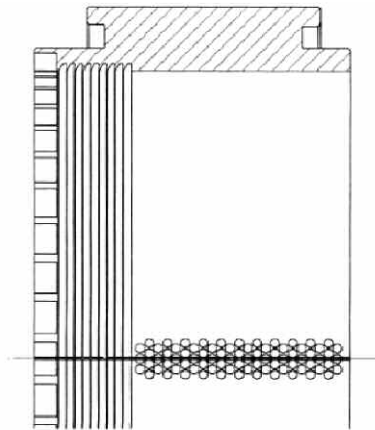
Hybrid Seal Labyrinth plus Hole Pattern.
